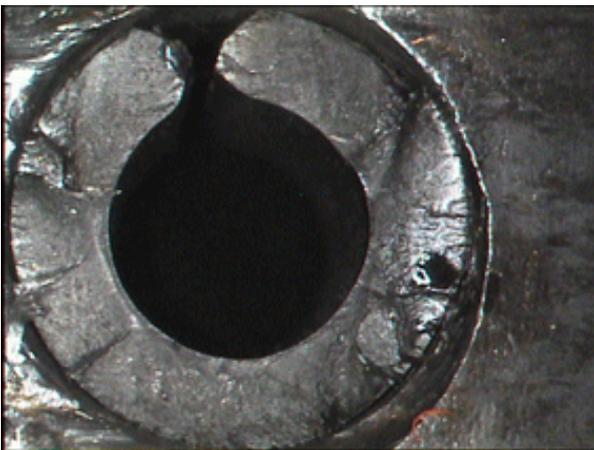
one of the fracture surfaces (photo taken with x50 magnification)
